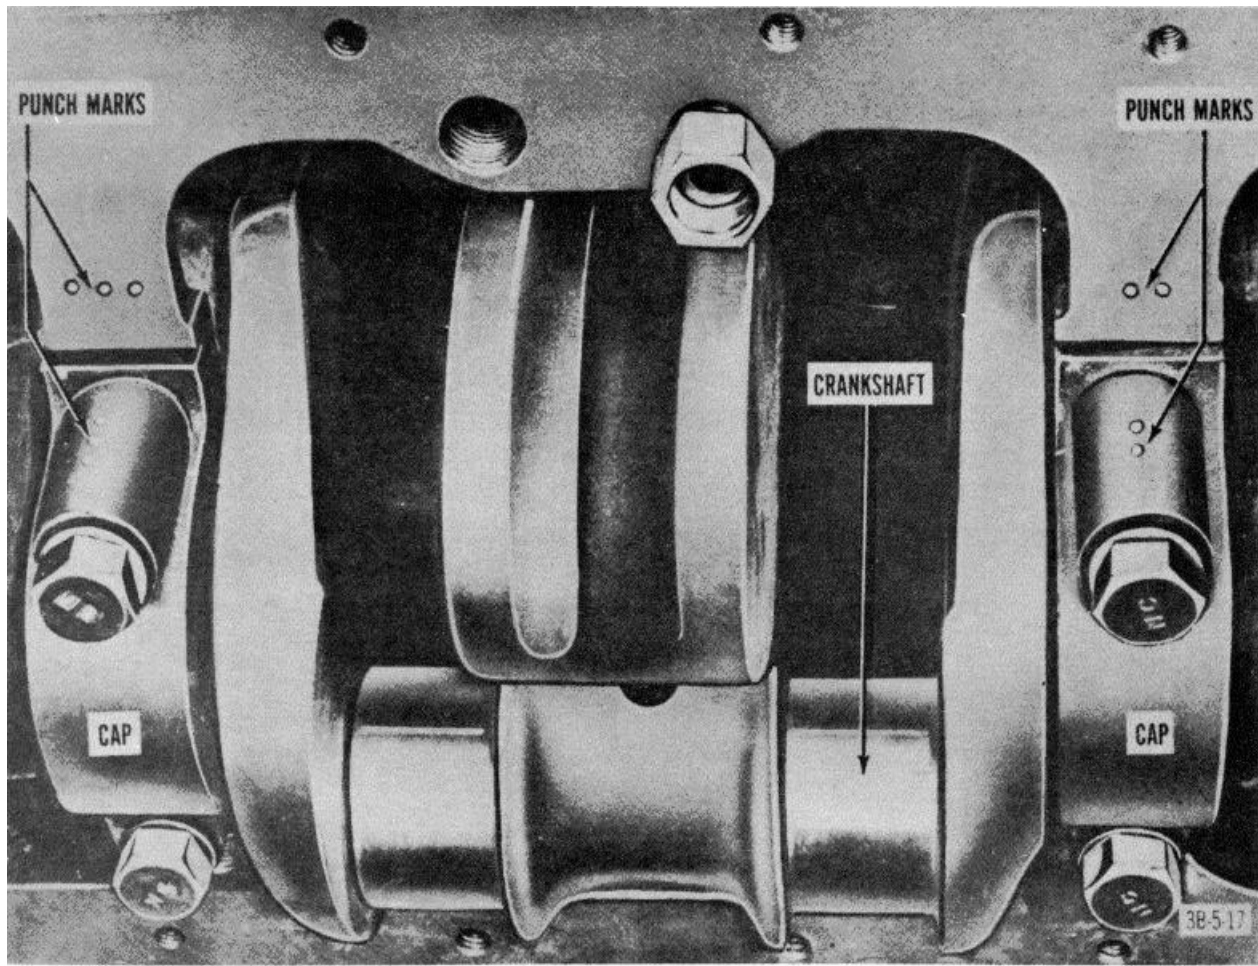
Punch marks on cylinder block and crankshaft bearing caps.
